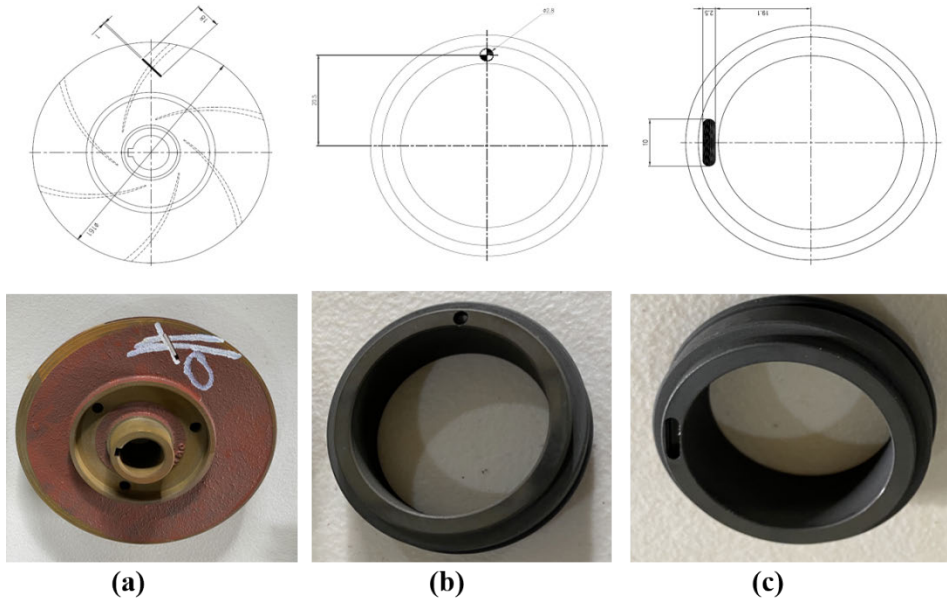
Specifications of different faults, i.e., (a) impeller crack, (b) mechanical seal hole, and (c) mechanical seal scratch.
